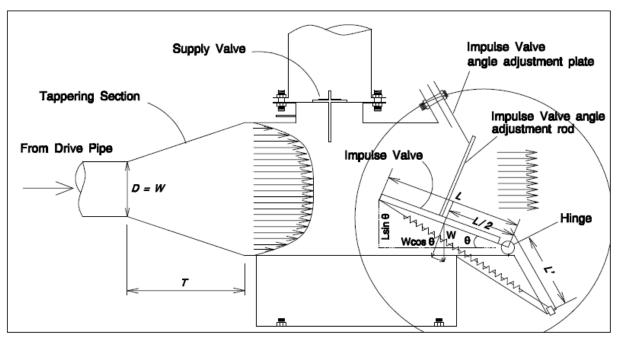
Introduction of a spring to replace valve weight: Pump section
